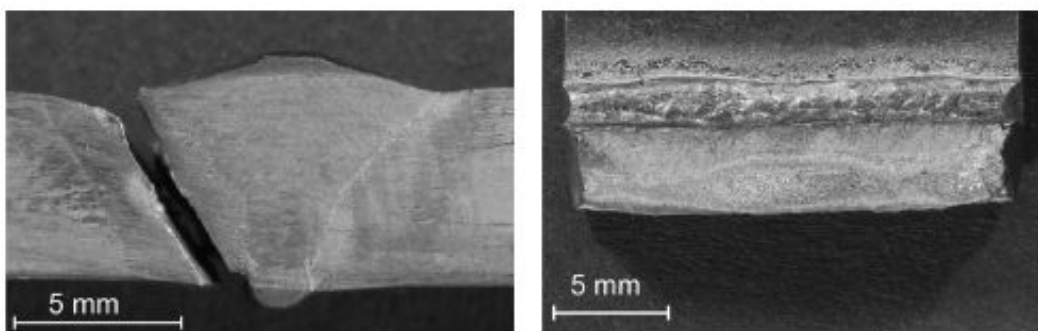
Fracture appearance of a sample with weld reinforcement, cooling time 5.5s.
